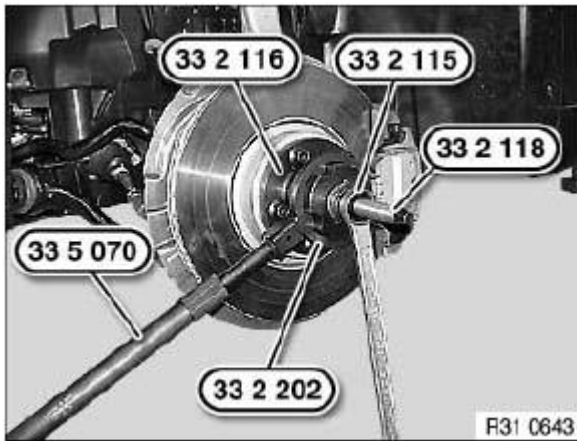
Identifying Special Tool (33 2 116), (33 2 202) And (33 5 070)
